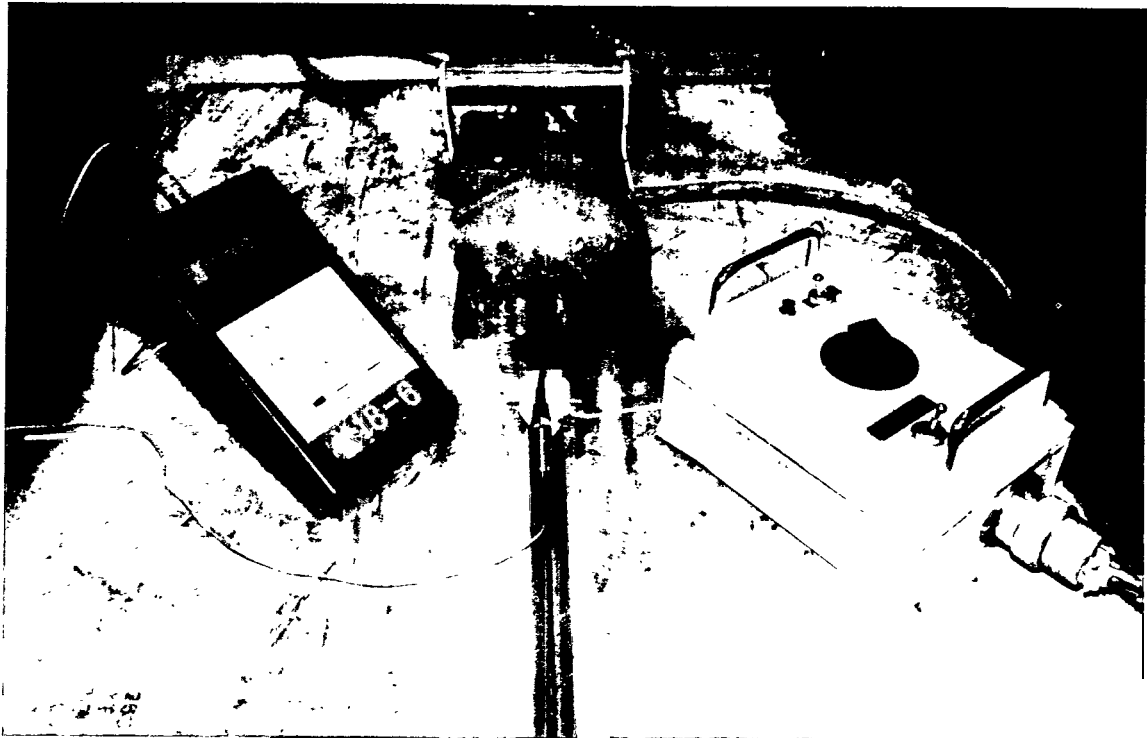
Typical placement of the magnetic field negator and gaussmeter probe across a weld joint.
